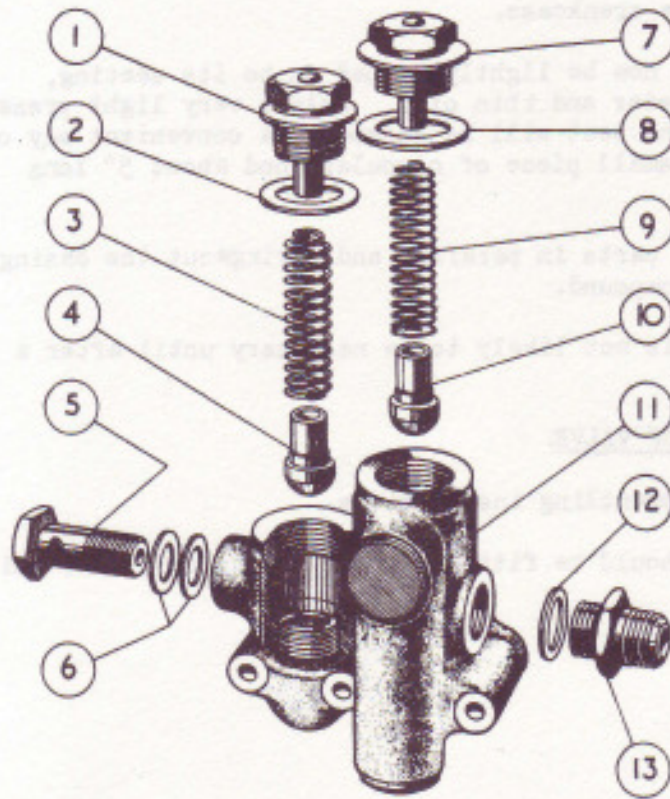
EXPLODED VIEW OF OIL PRESSURE RELIEF VALVE UNIT.
